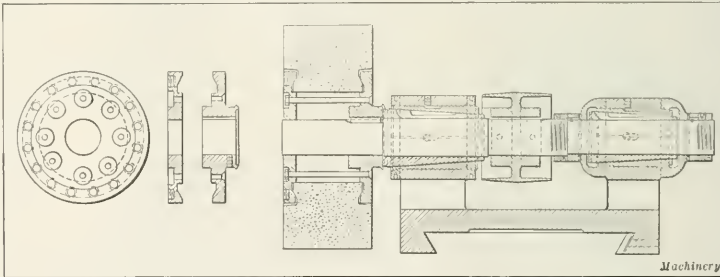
Arrangement of Wheel-spindle Bearings and Mounting of Wheel on Spindle
